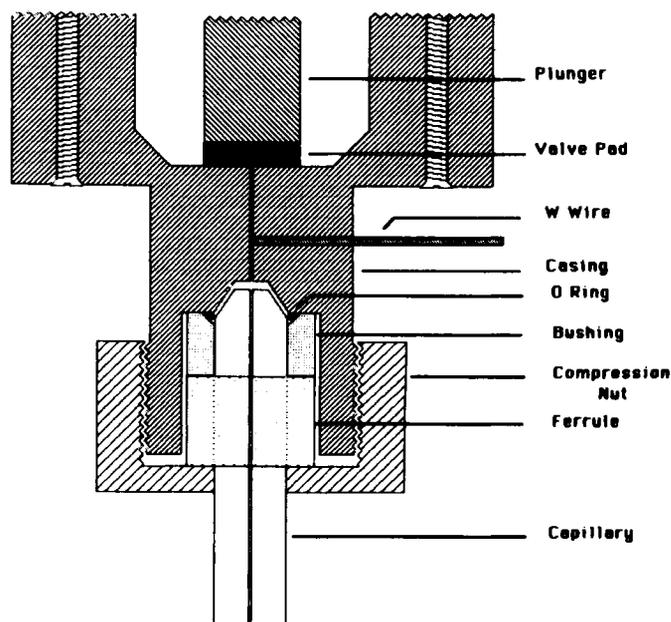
Enlarged view of valve seat and capillary attachment assembly
